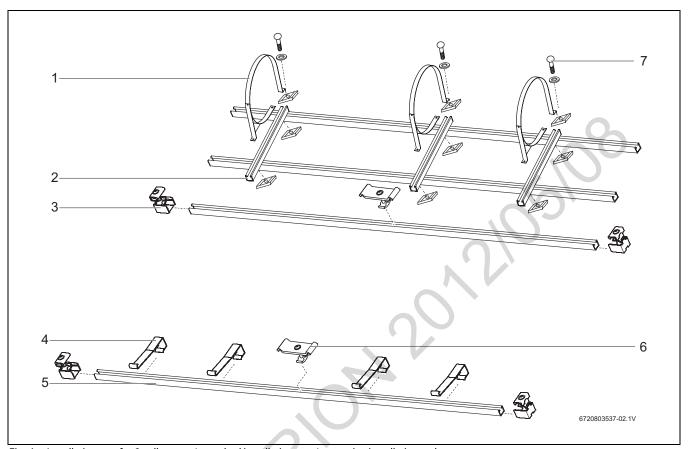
Installation sets for 2 collectors: 1 standard installation set, 1 extension installation tank set
